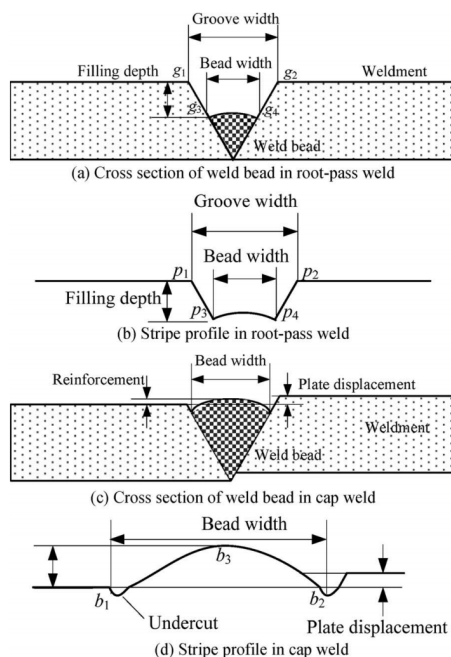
Definitions of weld bead and weld groove geometry [26]
